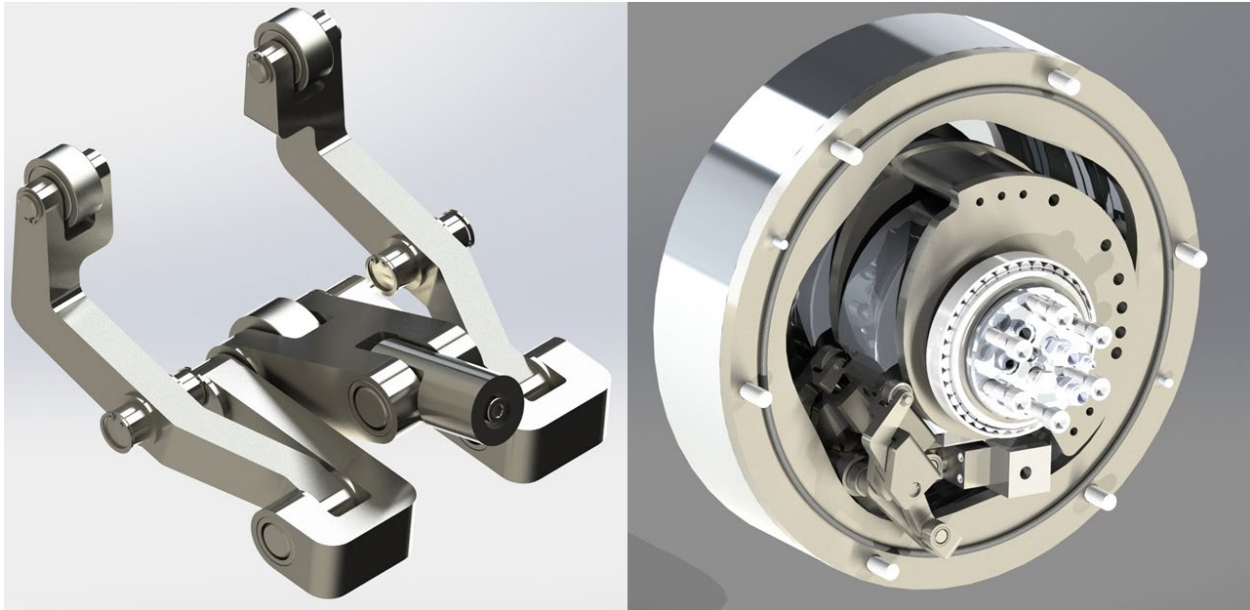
Rendering of the single-cylinder linkage and full motor assembly
